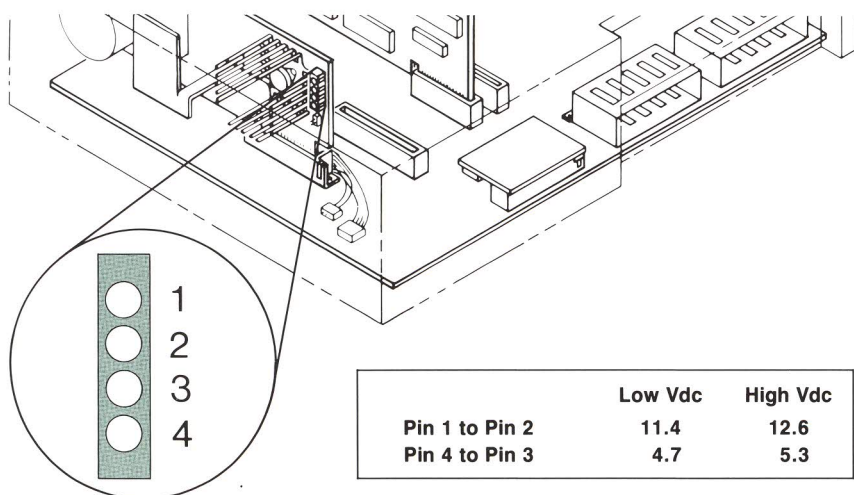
POWER PLUG FOR DISKETTE DRIVE.
